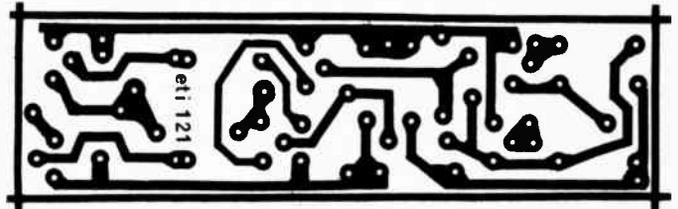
Printed circuit board for the pulser. Full size 23 x 65 mm.
